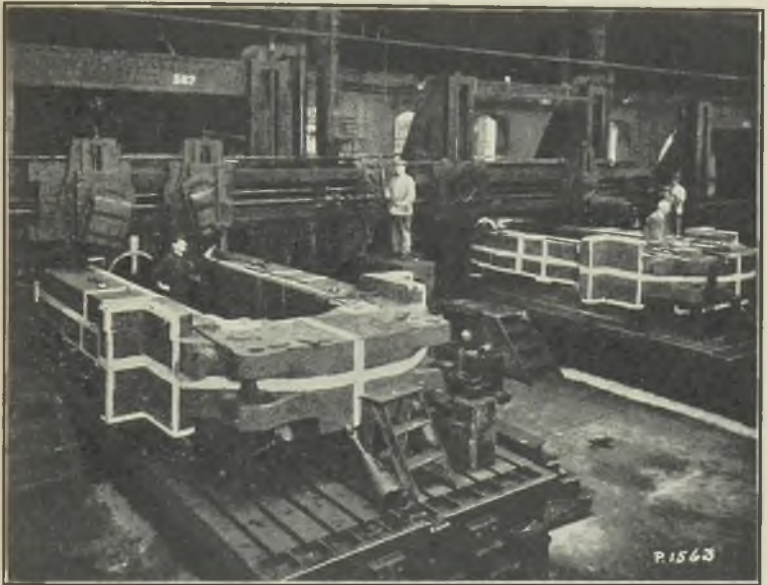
TWO ROLL HOUSINGS OF ENGLISH MANUFACTURE.
